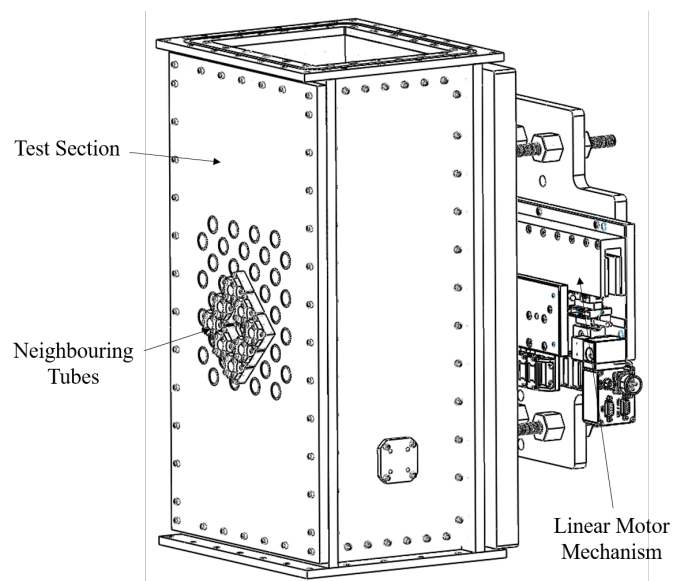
Test section and linear motor mechanism assembled with tube and force transducer.
